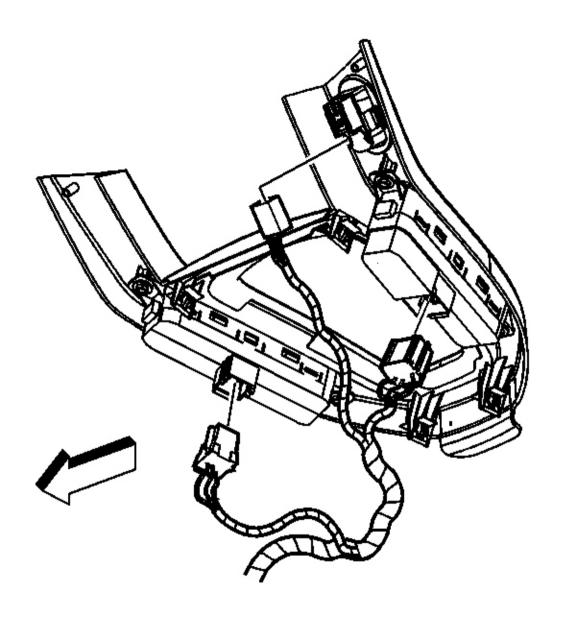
Electrical Connectors & Window Switch Trim Bezel Courtesy of GENERAL MOTORS CORP.
